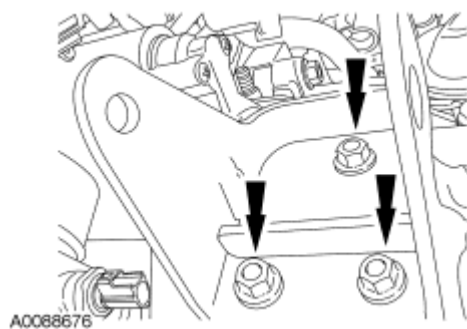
Locating Transaxle Front Mount Plate Bolts
